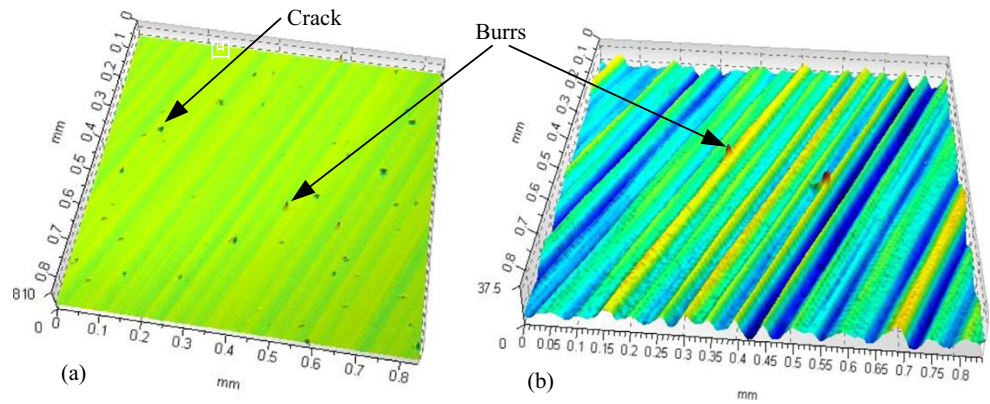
Microscope image of the machined surface after grinding and semi-finish fly cutting
